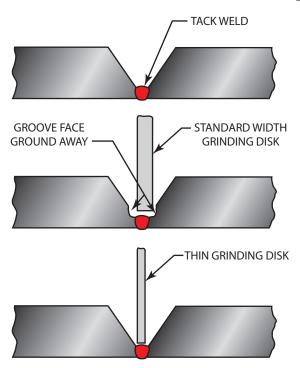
Using a narrow grinding disk avoids damaging the groove face.
